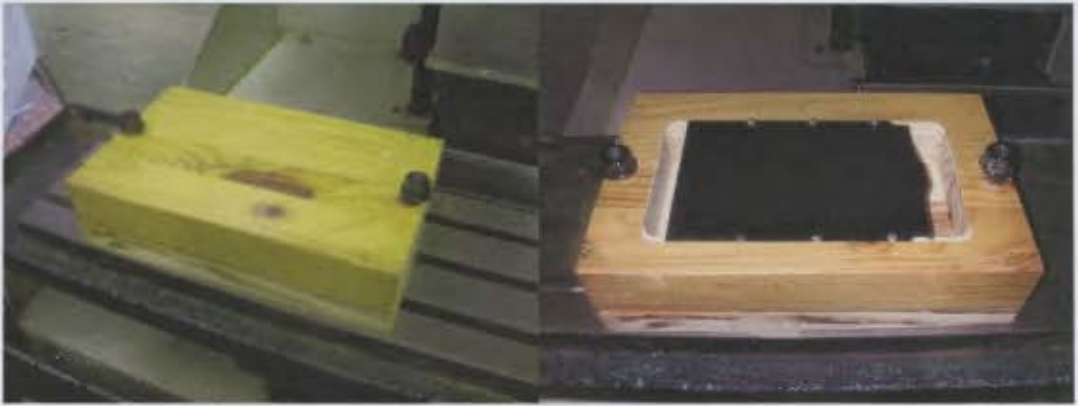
BOTTOM-COVER MACHINING (III)
